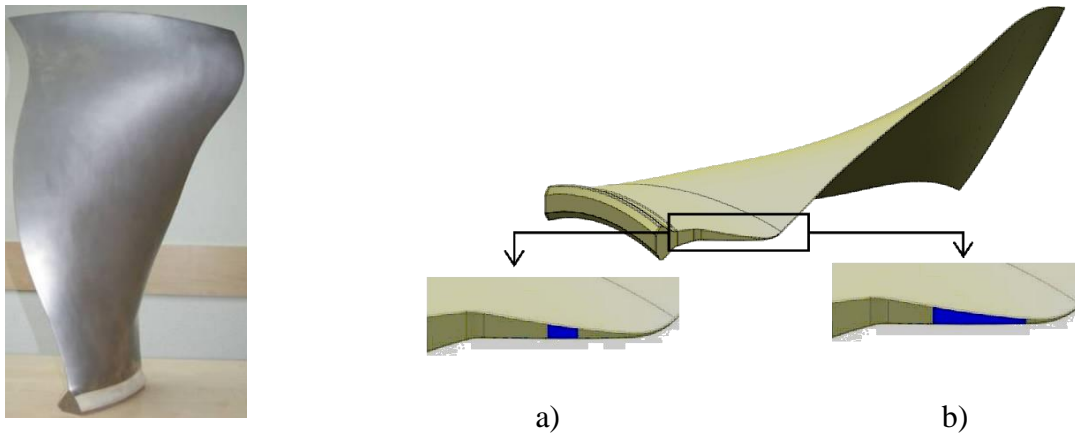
The hollow fan blade with corrugation filler and contact areas for damper No. 1– (a) and for dampers No.2 & No.3 – (b)
